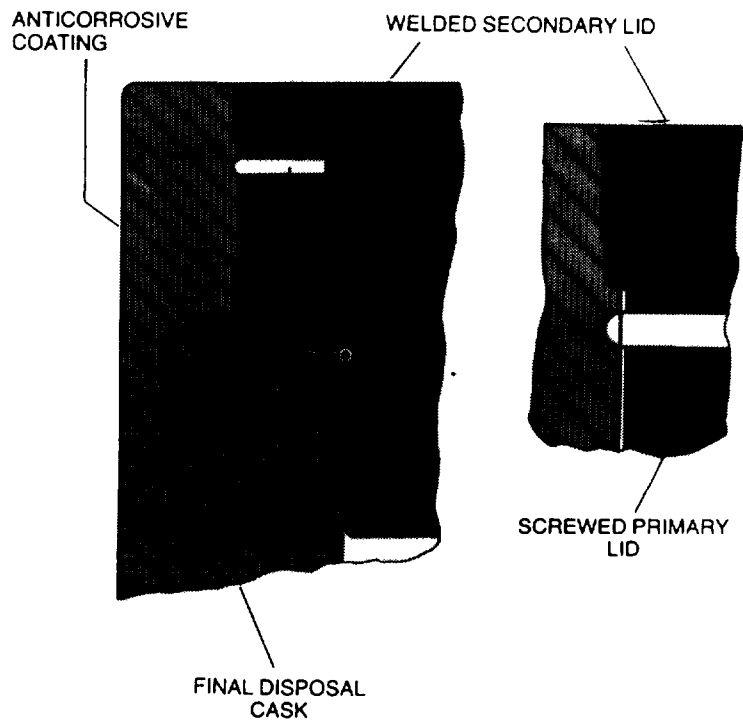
Pollux containment concept narrow gap welding.
